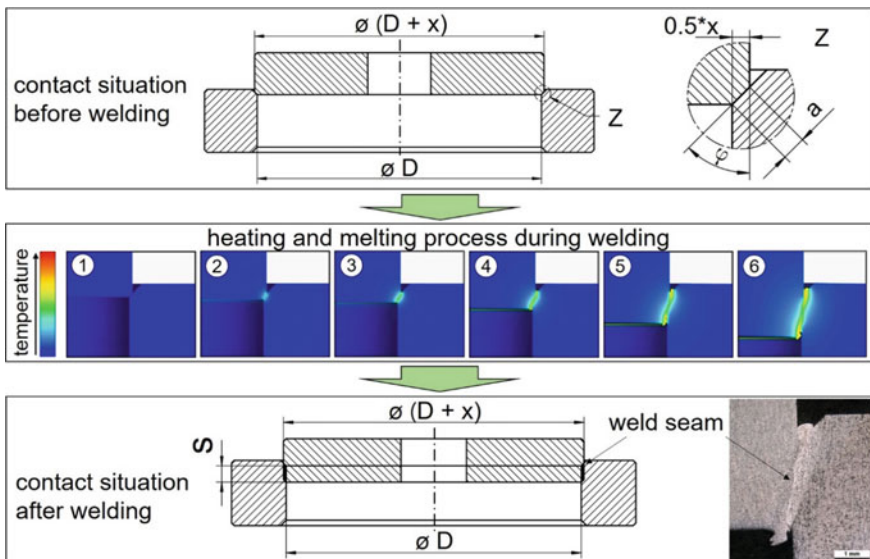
Arrangement of the joining partners for CD-welding of annular axial seams
